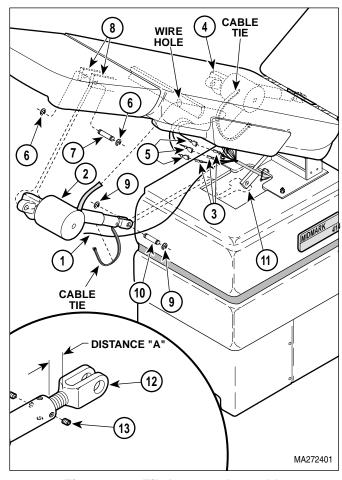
Tilt Actuator Assembly Removal / Installation
